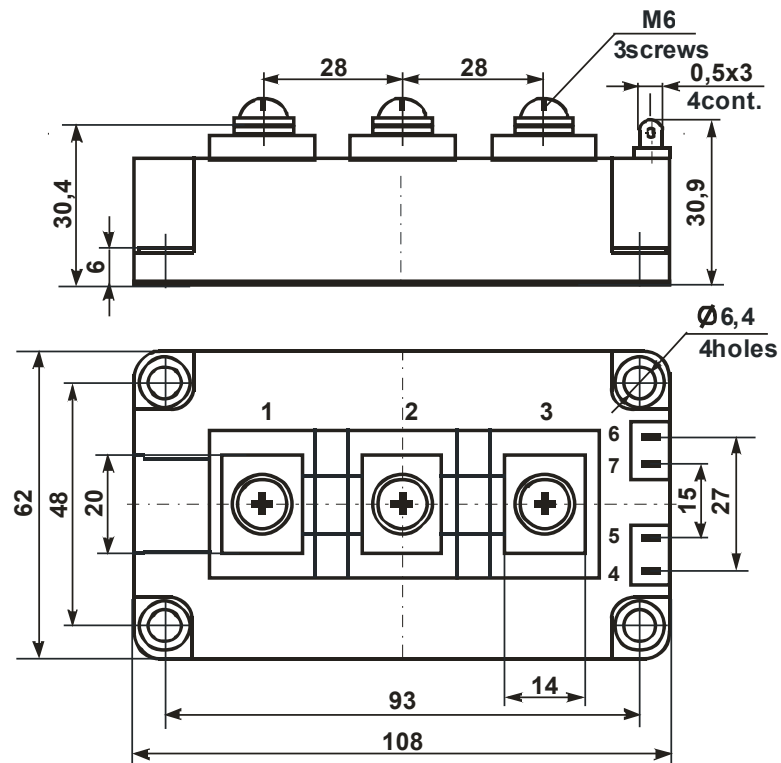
Overall dimensions of modules M12 (housing "E3-1")
